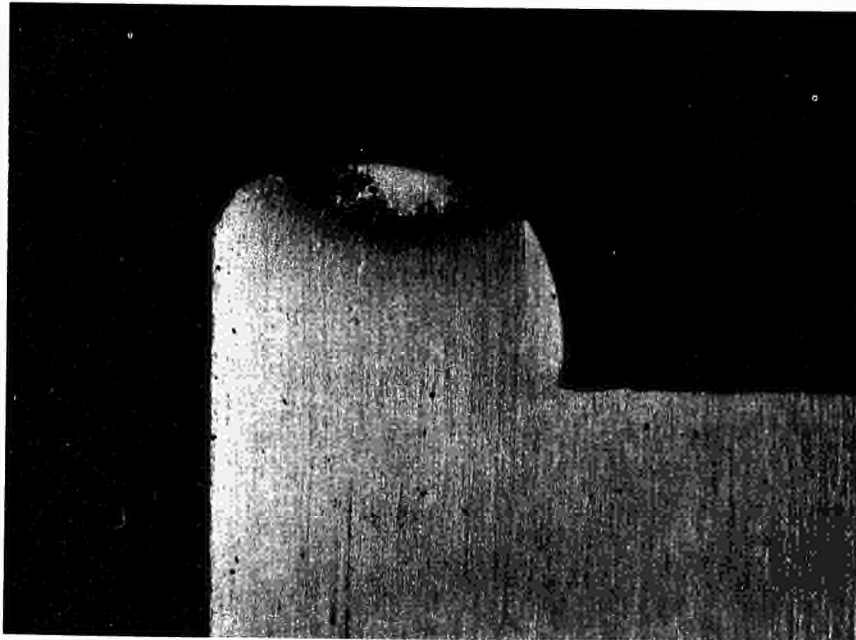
End-plug type b - welding of S.A.P.
